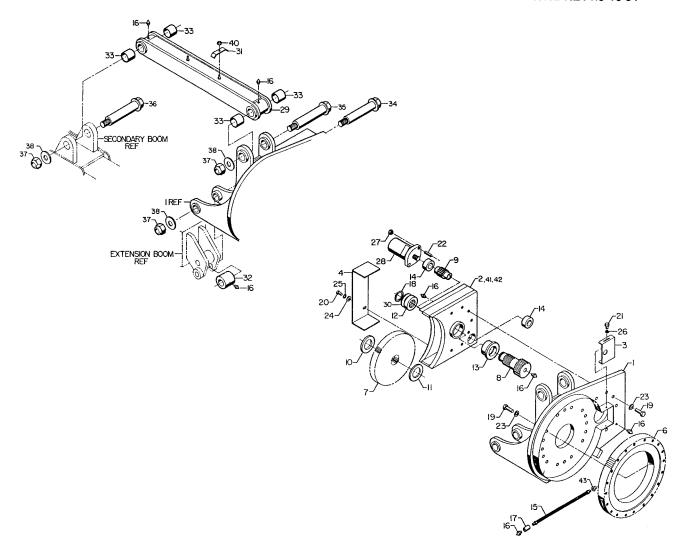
WELDMENT PART NUMBER LOCATIONS
